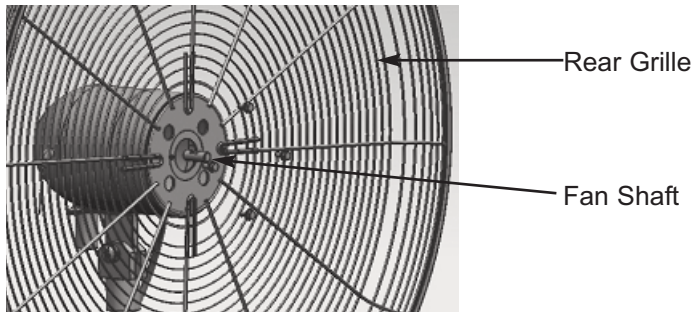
Attaching Rear Grille to Shaft - Pedestal Fan
